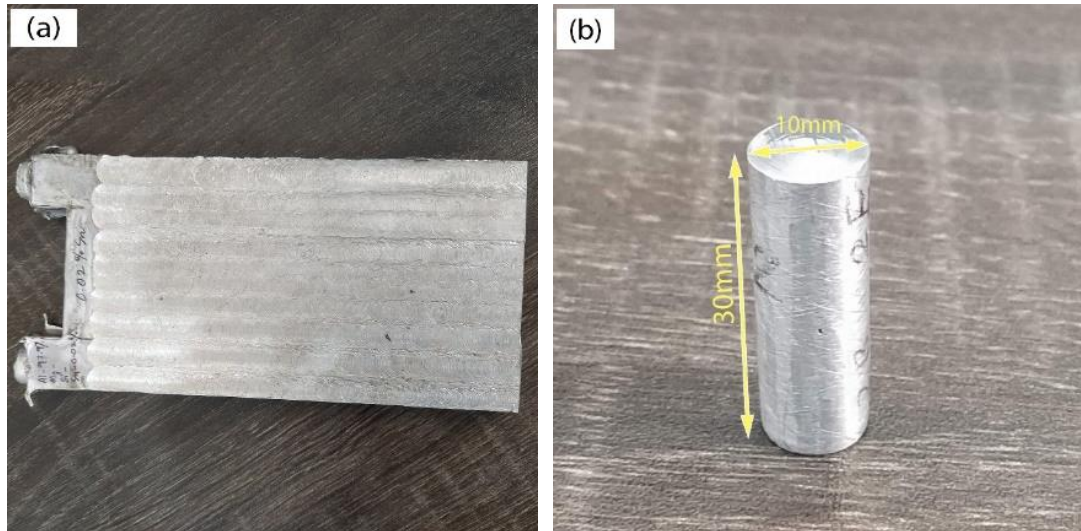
1 (a) Cast Al-Mg-Si alloy (b) Pin specimen
